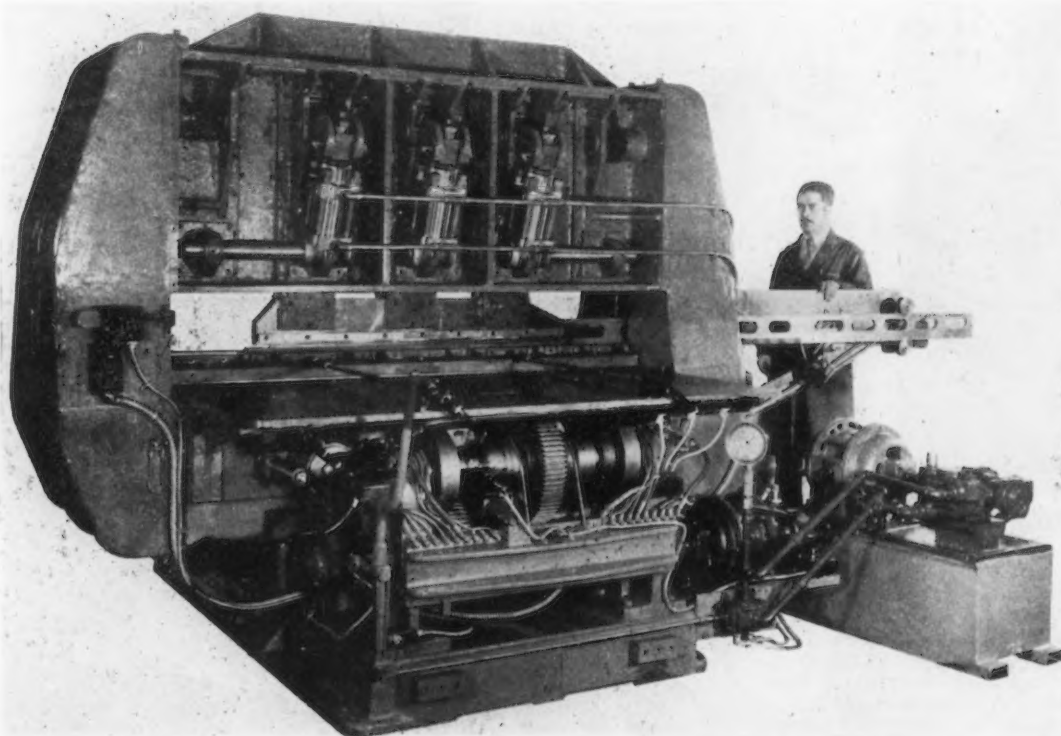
Flash welding machine designed to weld sheets 90-in. wide. Transformer capacity is 300 kw. Clamping pressure is applied hydraulically and upsetting is operated through motor drive. Elkonite electrodes are employed.
